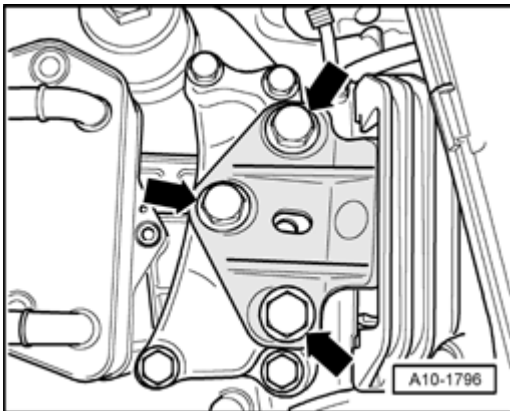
Locating Engine Carrier Bolts (Transmission Side)
